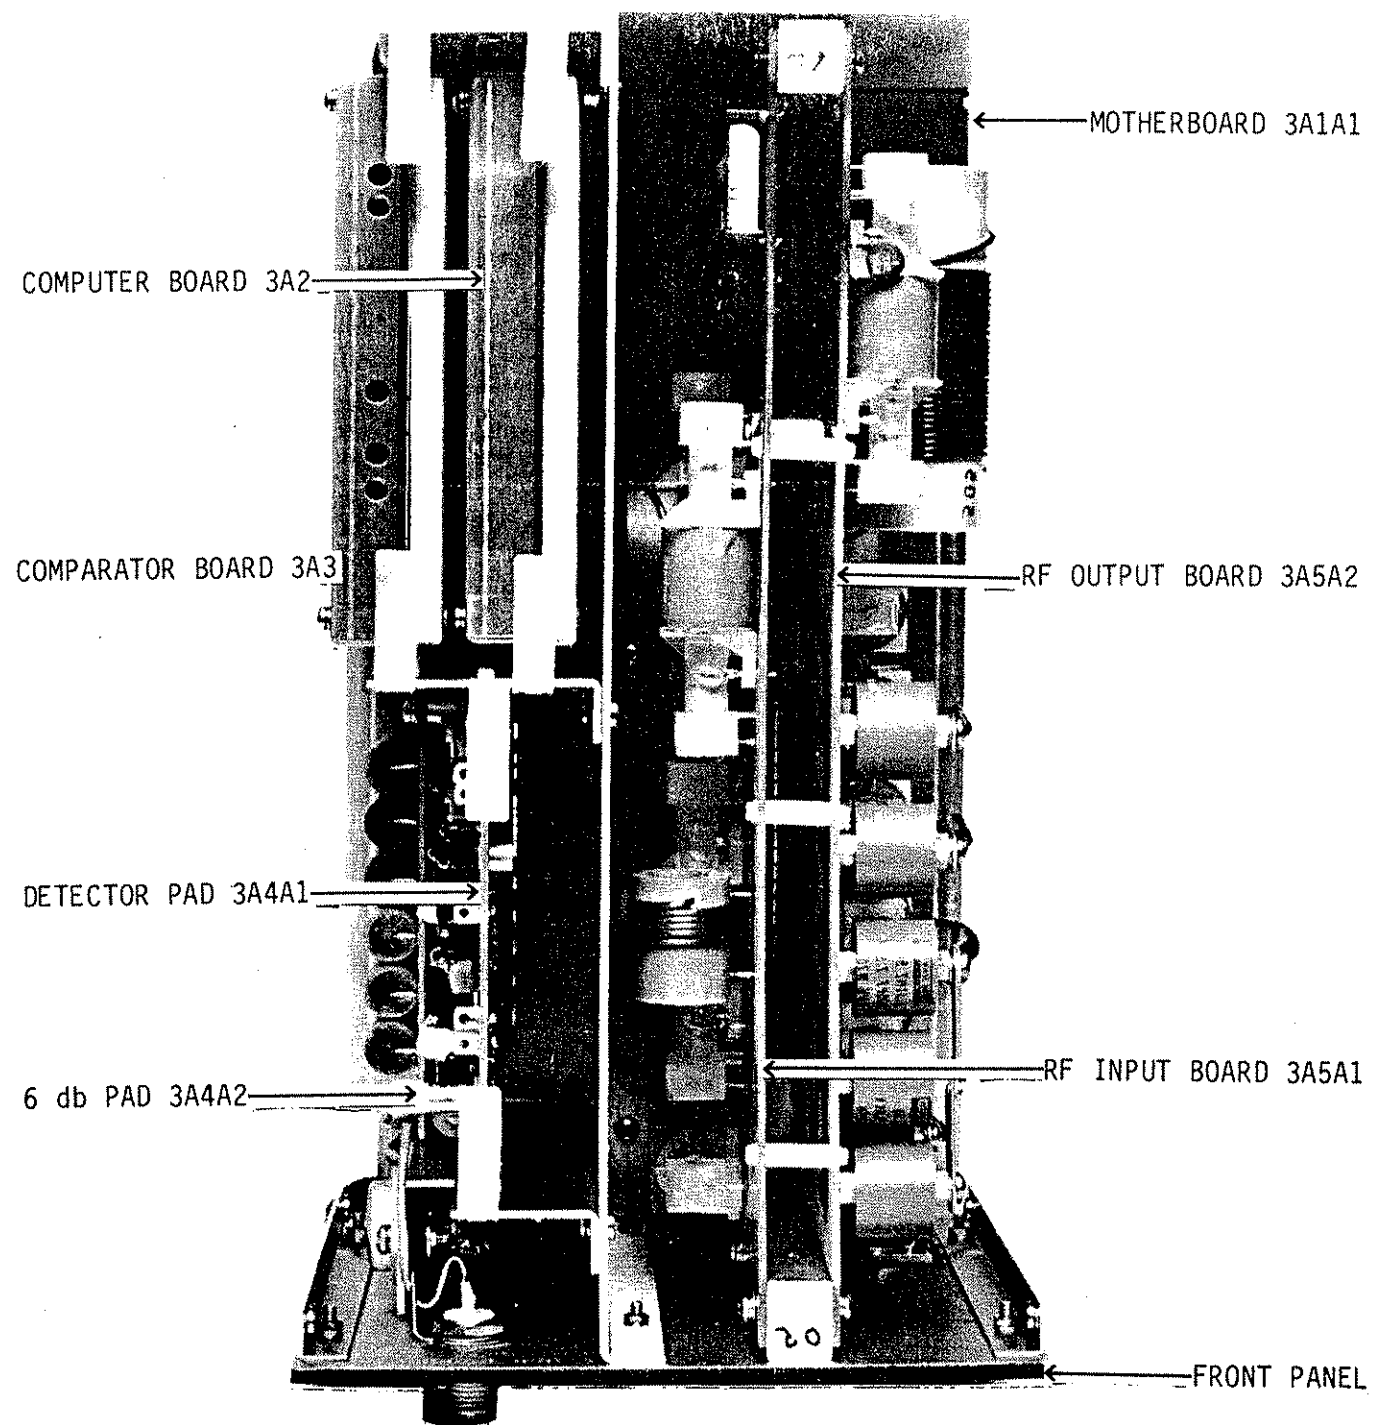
ACU-150D MAJOR ASSEMBLY LOCATIONS
